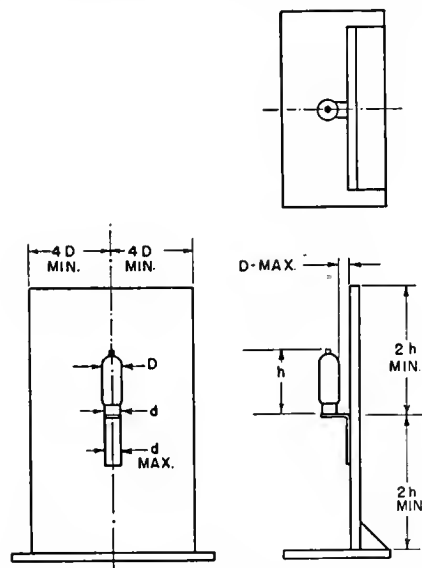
Test mounting for mercury-vapor-tube temperature tests.
